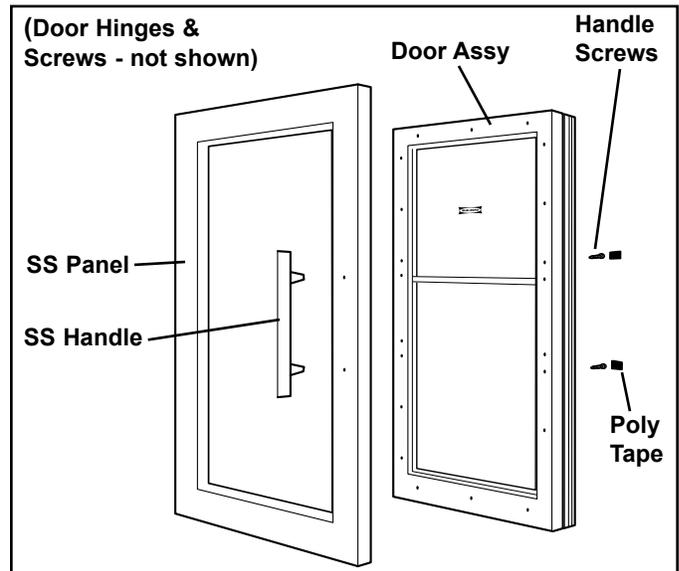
Model 424 Stainless Steel Door Panel Removal
